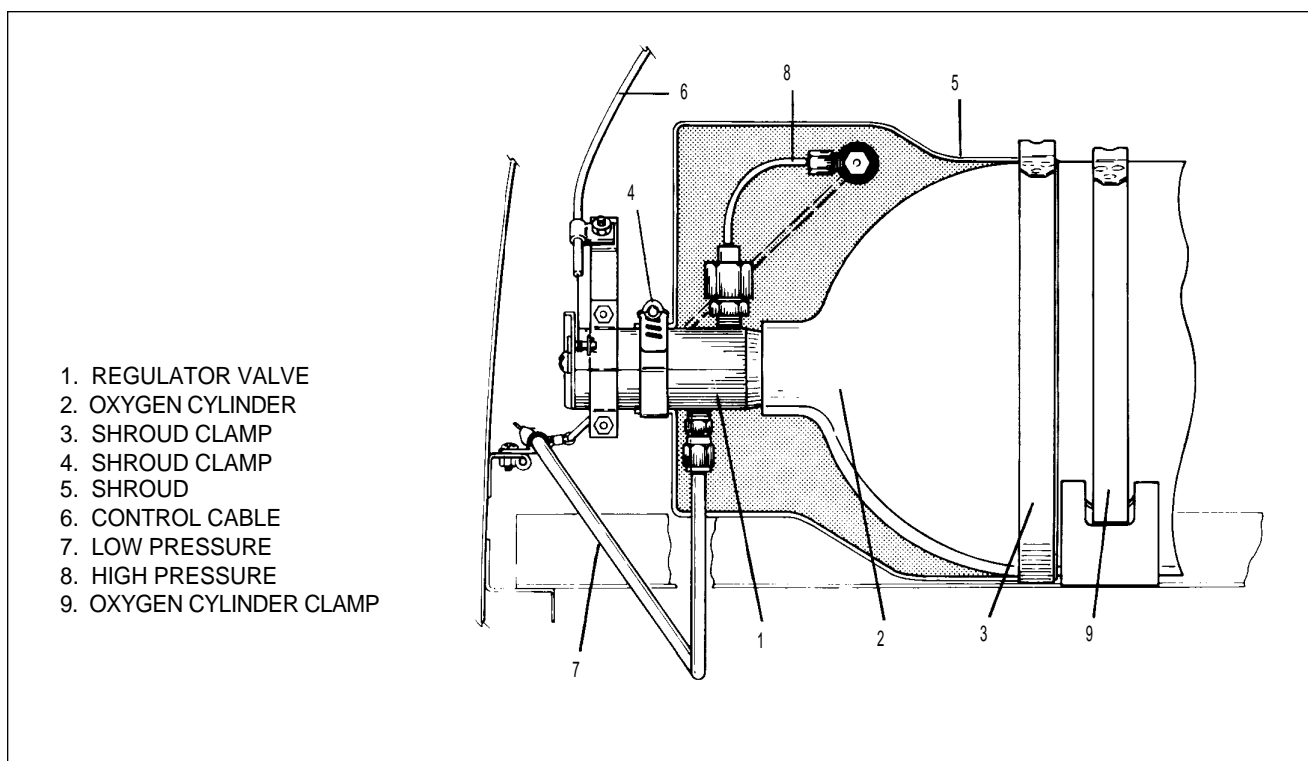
Oxygen Cylinder and Regulator Assembly
